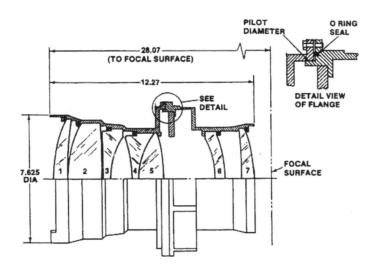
Sectional view of a lathe-assembled aerial camera lens assembly. Dimensions are given in inches. (From Bayar.⁷)
